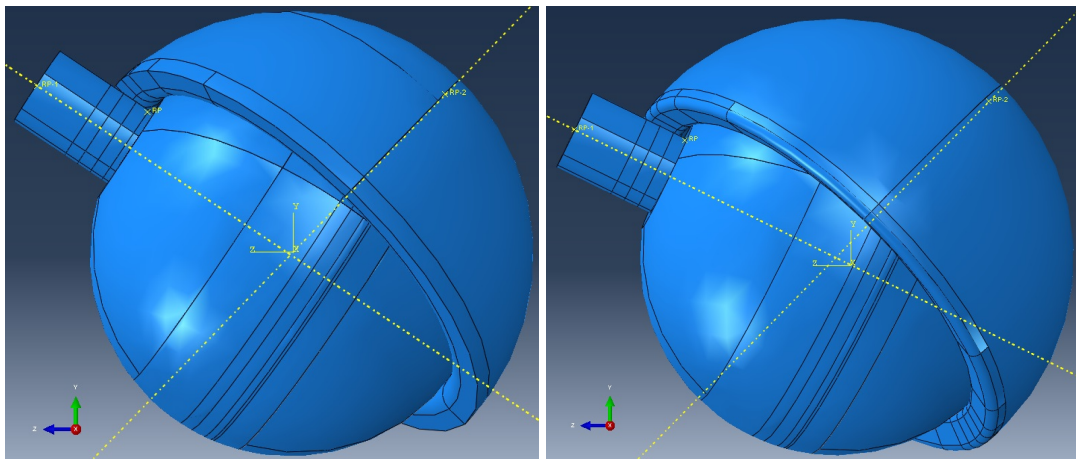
CM assembly for Neck-Rim impingement Figure 6.12. IM assembly for Neck-Ring impingement
